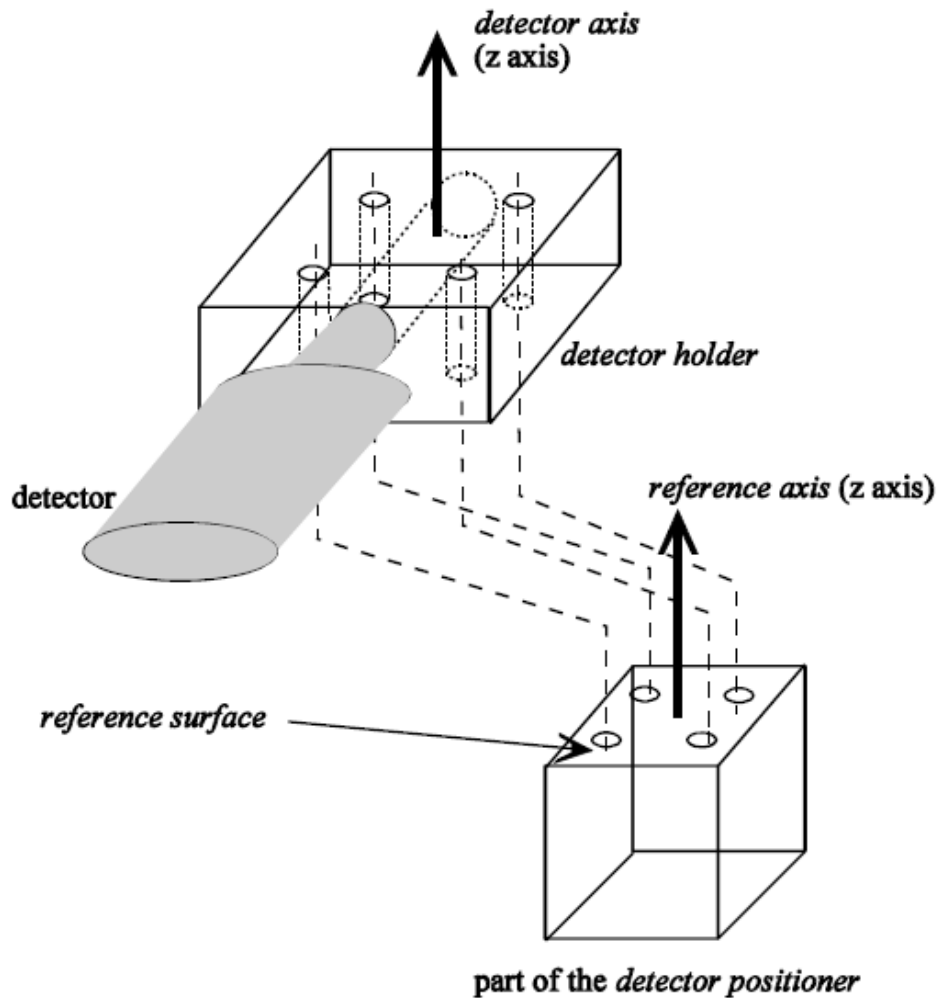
Drawing of the detector holder and detector positioner showing attachment at the reference surface
